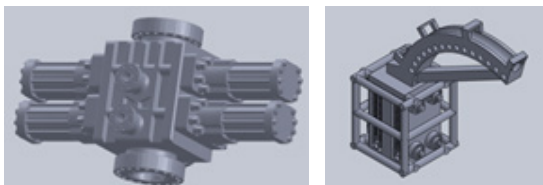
Design of parts over well-head assembly in SolidWorks (BOP, injector of coiled tubing unit) / Figura 11. Diseños en Solid Works de piezas sobre arme de cabezal de pozo (BOP, inyector de unidad de coiled tubing)
